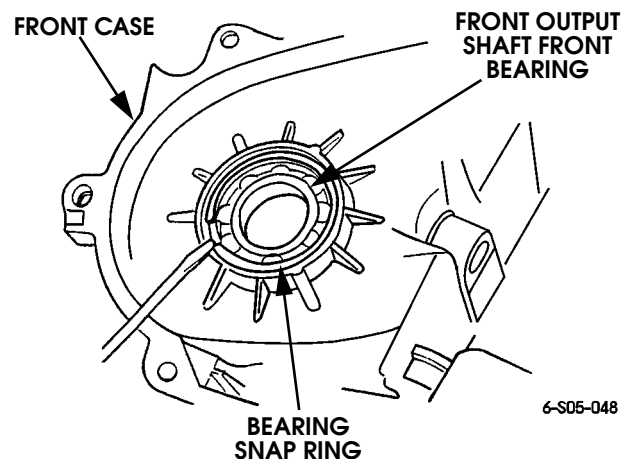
Front Output Shaft Front Bearing Snap Ring Removal/Installation
